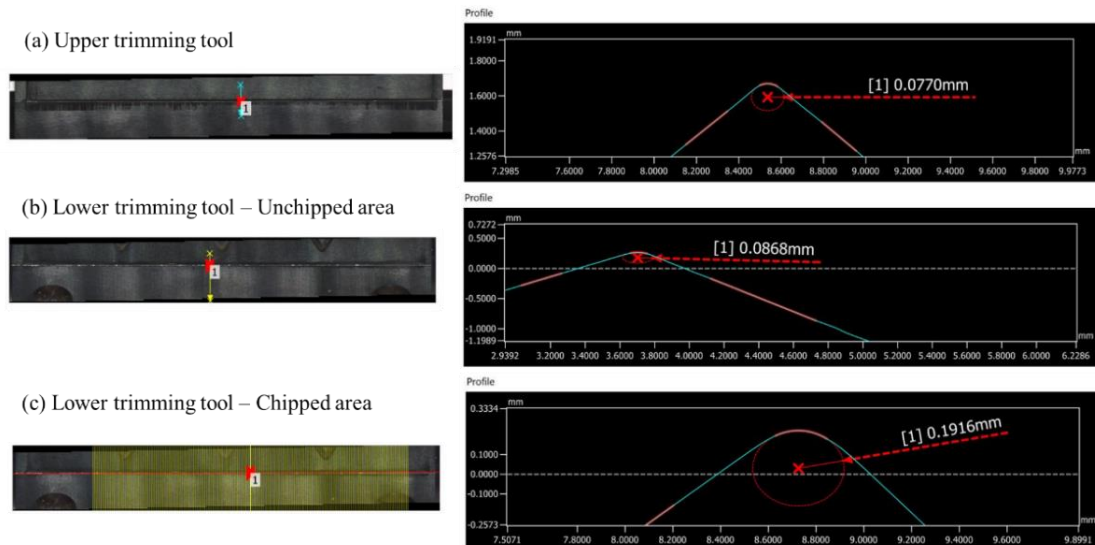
Measured fillet radius after 230,000 cuts for (a) upper trimming tool, (b) lower trimming tool – unchipped area, and (c) lower trimming tool – chipped area.
